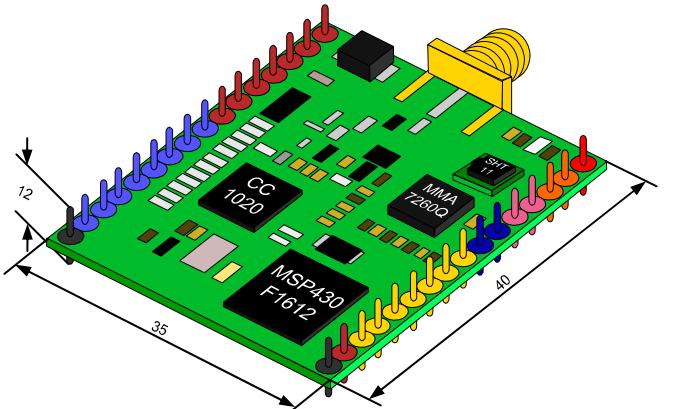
Scheme of the ScatterWeb core board MSB-430 (drawing by courtesy of Bastian Blywits)
